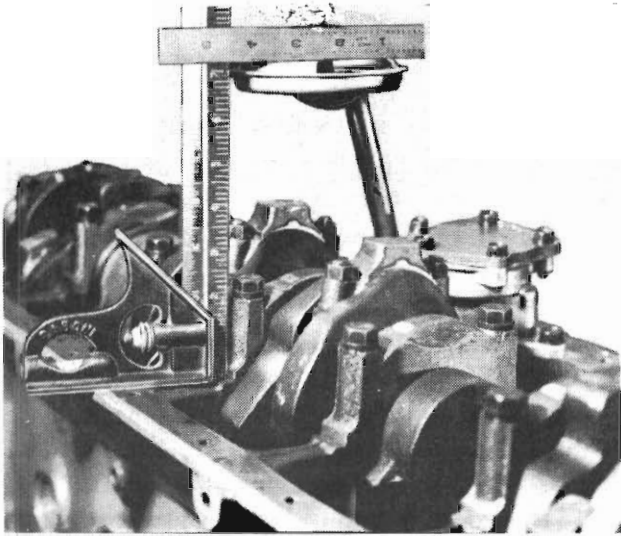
Positioning oil pick-up tube (6 cylinder models)
